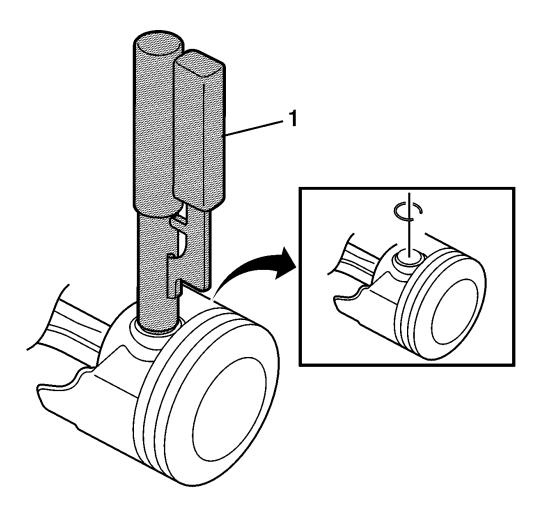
Piston Pin Retainer And Special Tool Courtesy of GENERAL MOTORS COMPANY
